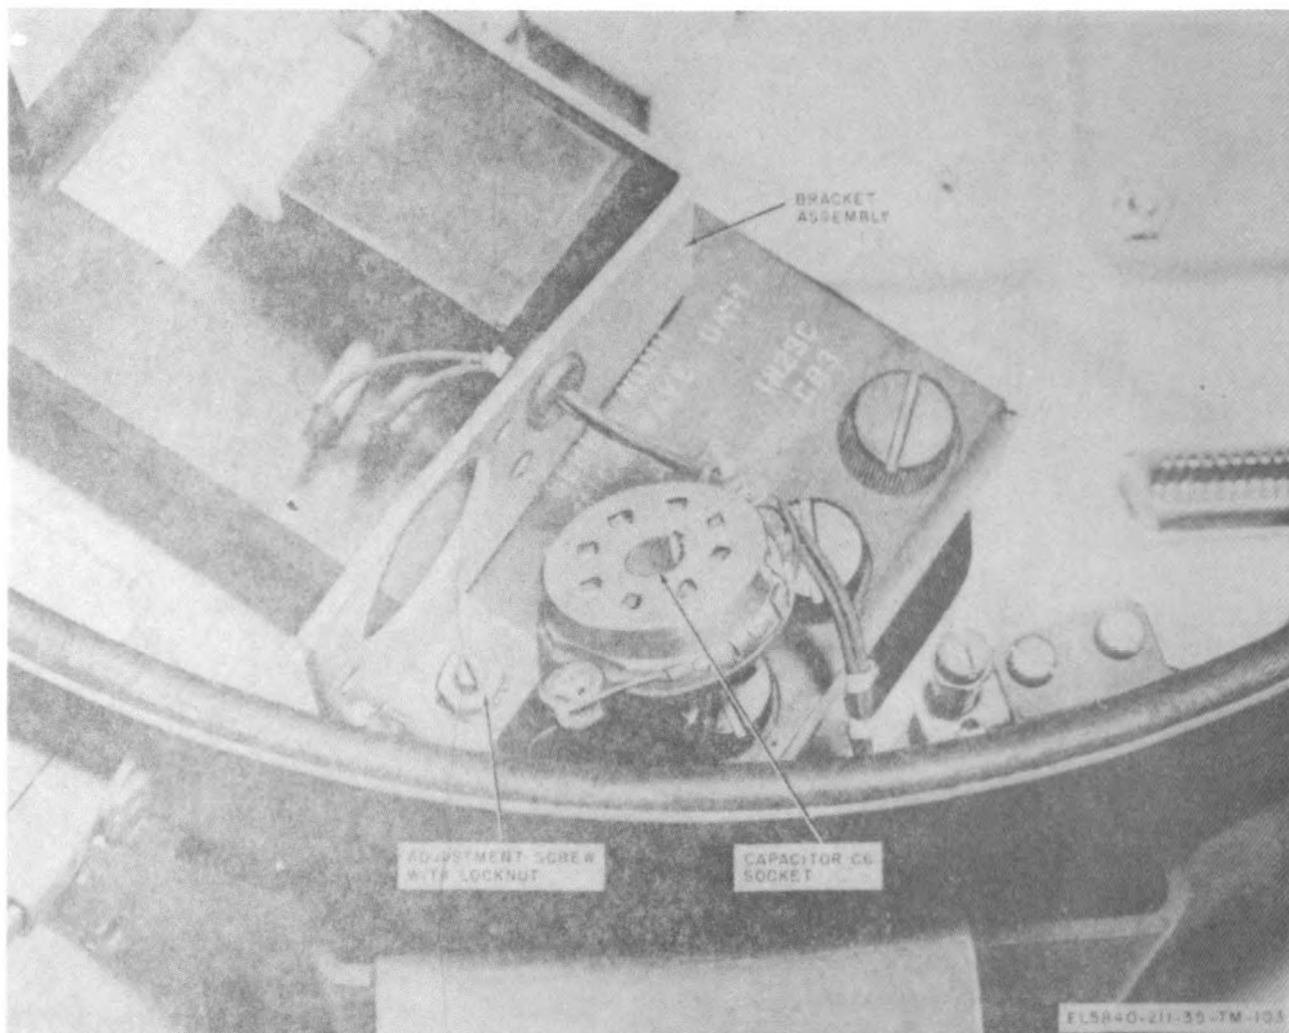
Capacitor C6 socket removed and adjustment screw with locknut exposed.
